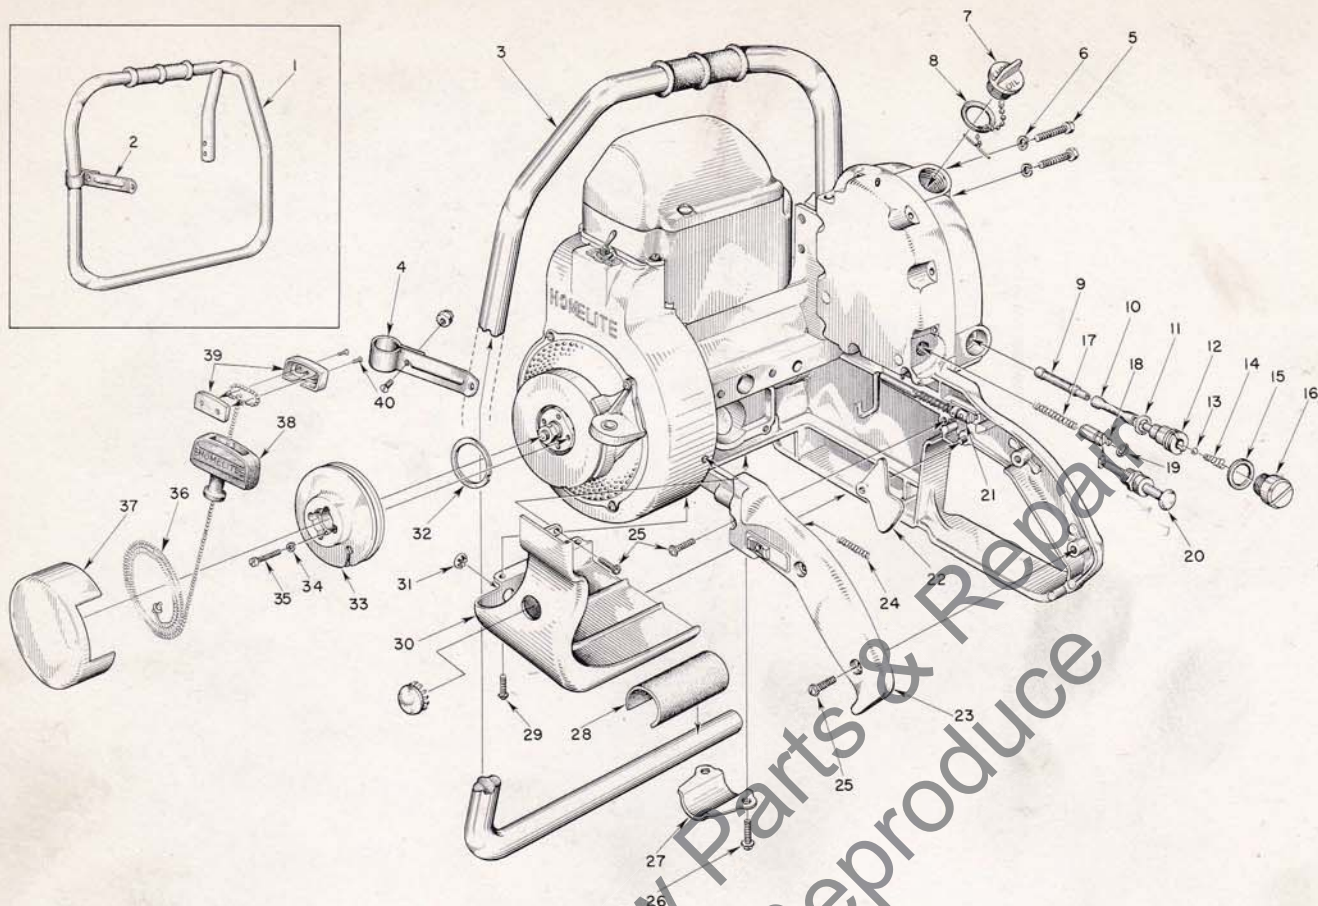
STARTER, HANDLE, GRIP AND LUBRICATOR PARTS
